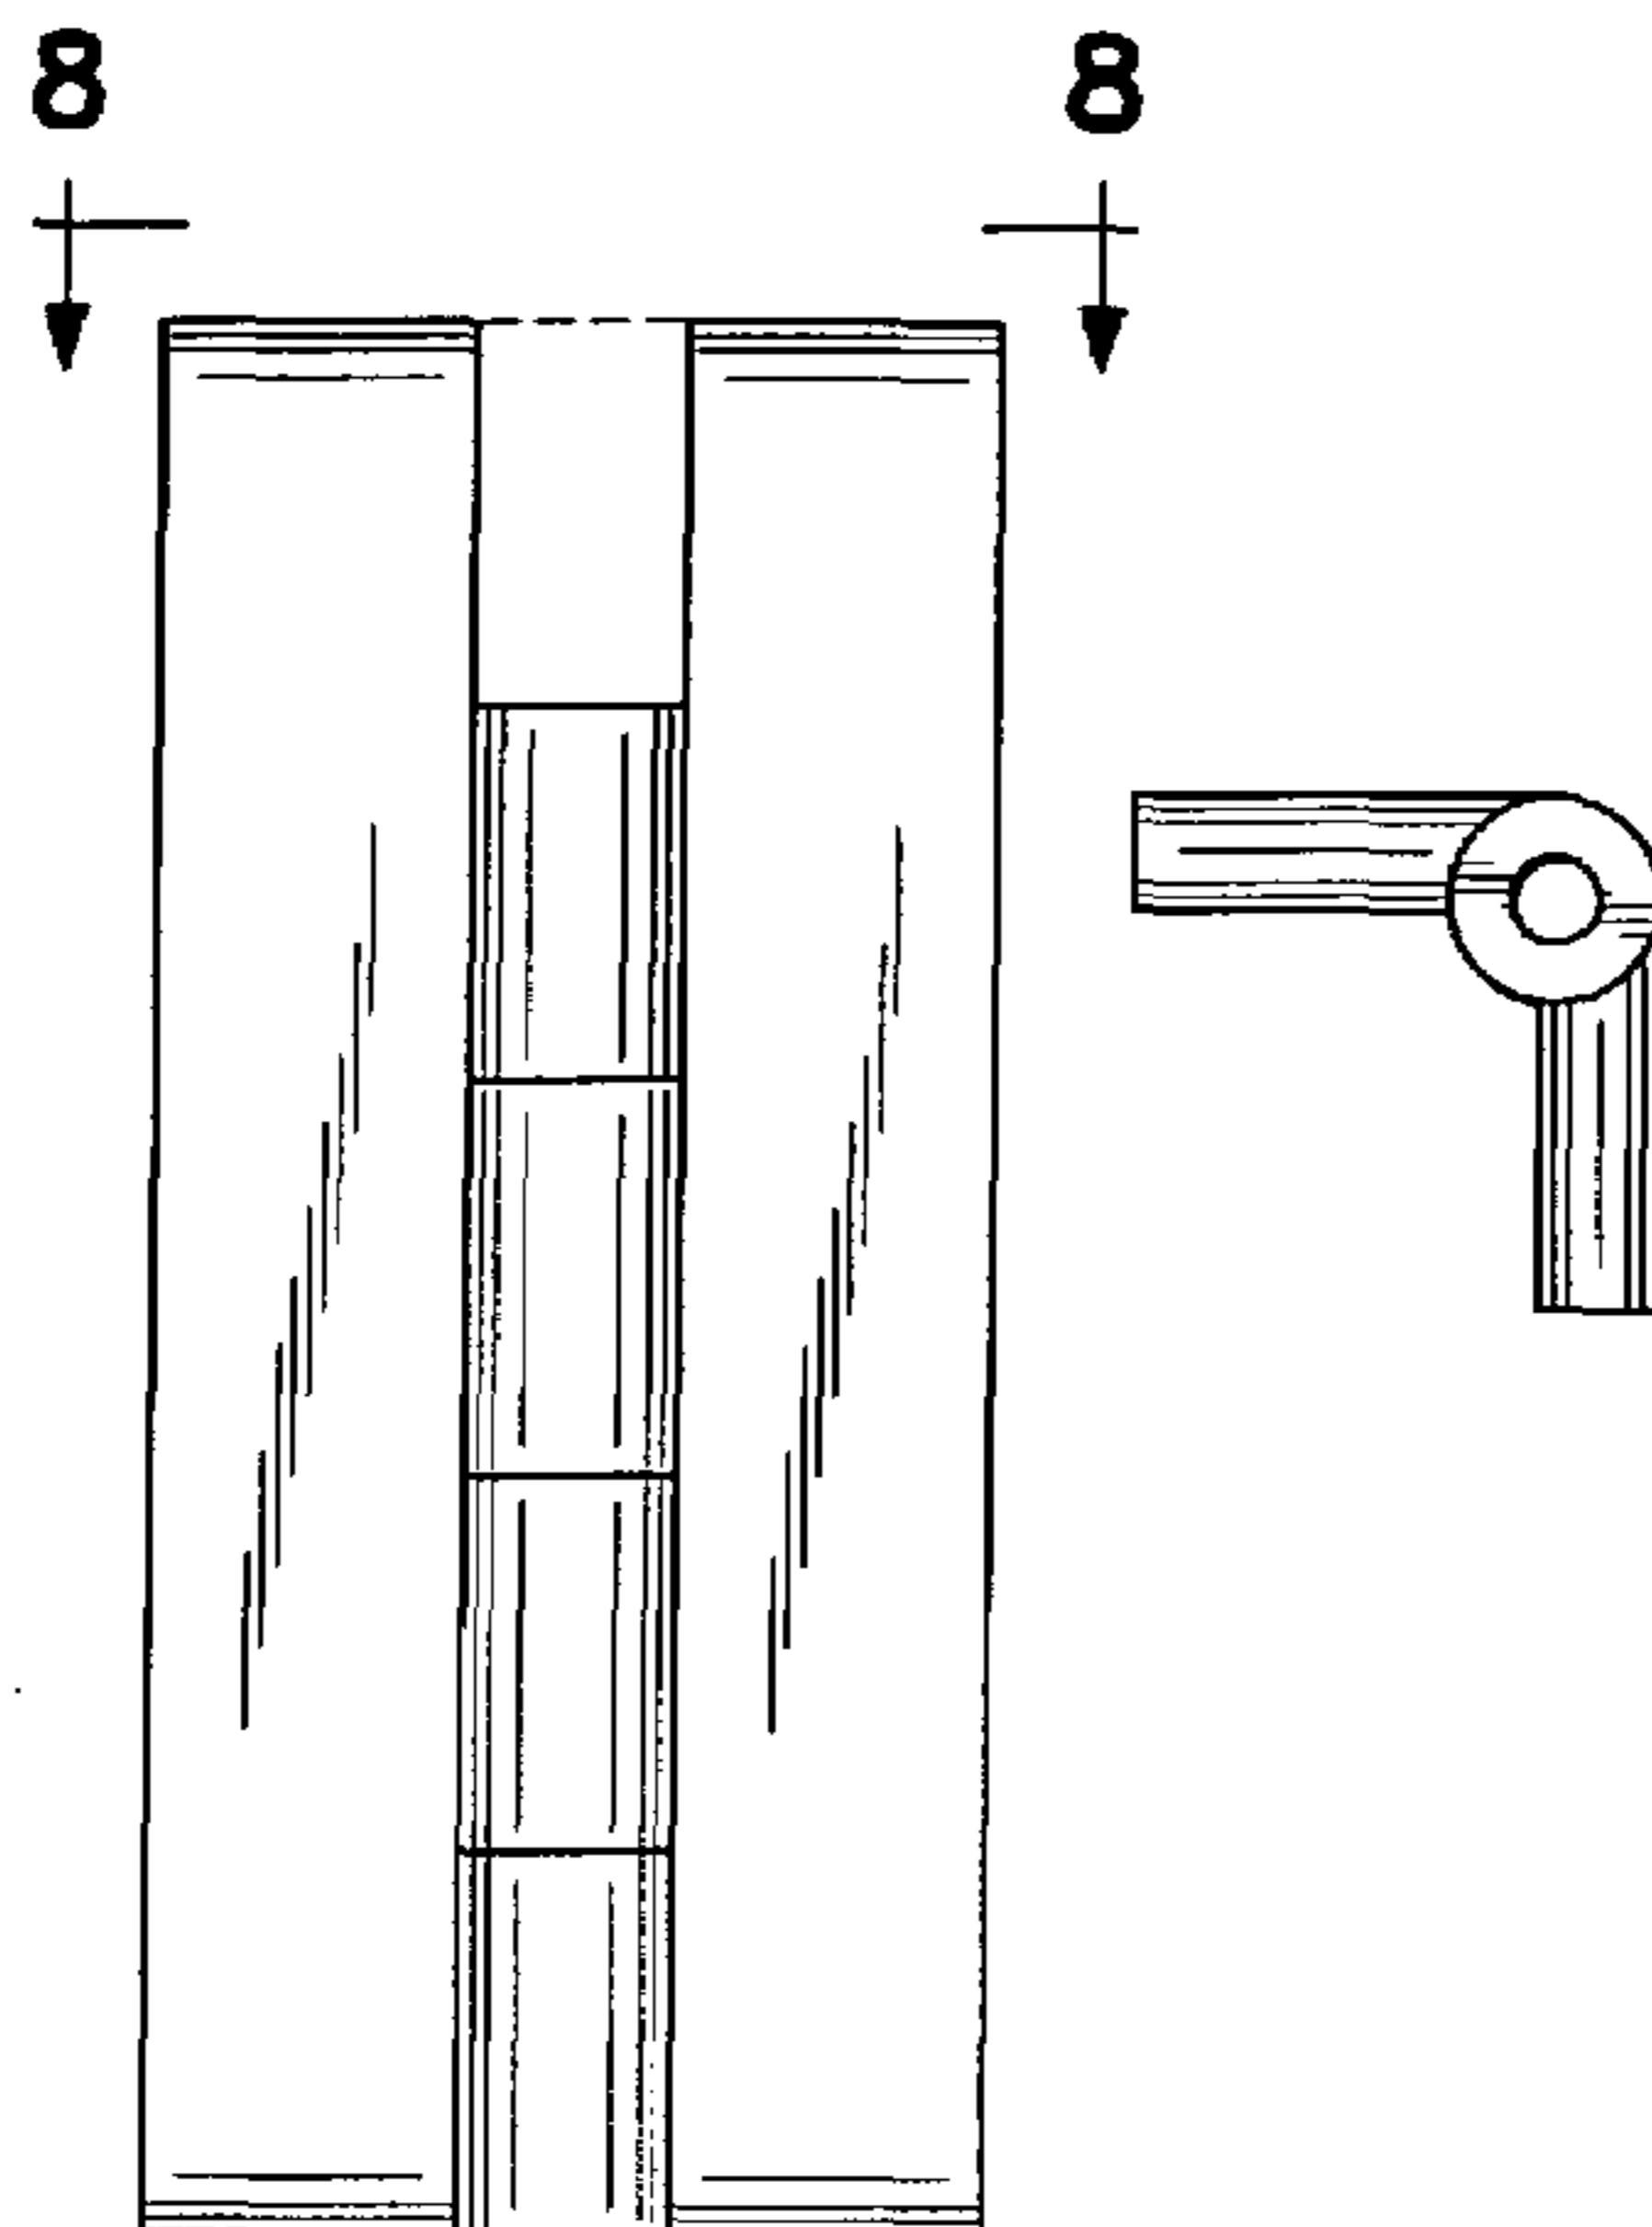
is a bottom plan view of the hinge assembly of FIG. 7 in the direction of lines 8—8;
